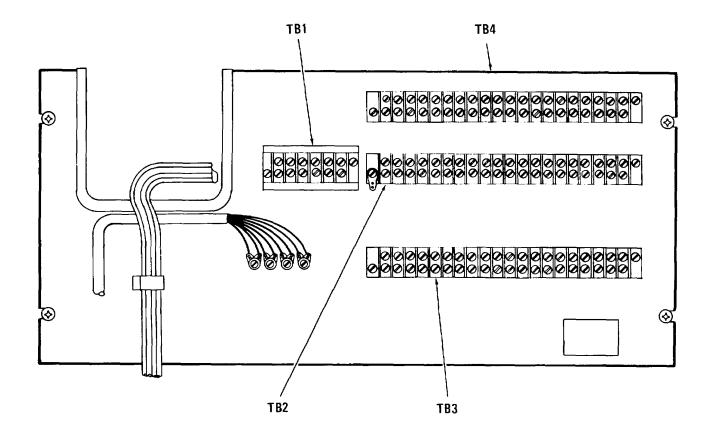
Electrical Equipment Rack Disassembly (Sheet 3 of 3)
